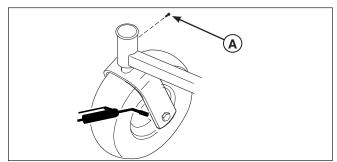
Front Caster & Wheel A. 1/4-28 Bolt
